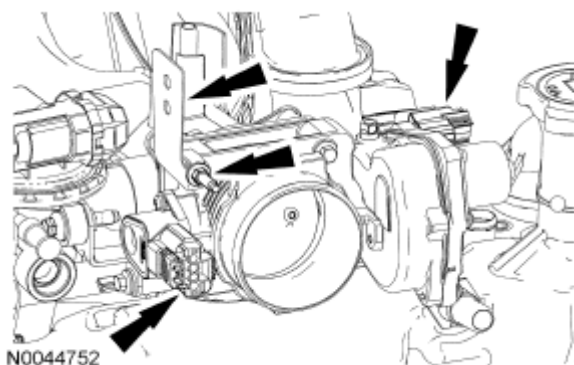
Locating Electronic Throttle Body (TB), Throttle Position (TP) Sensor Electrical Connectors, Wiring Harness Bracket And Nut
